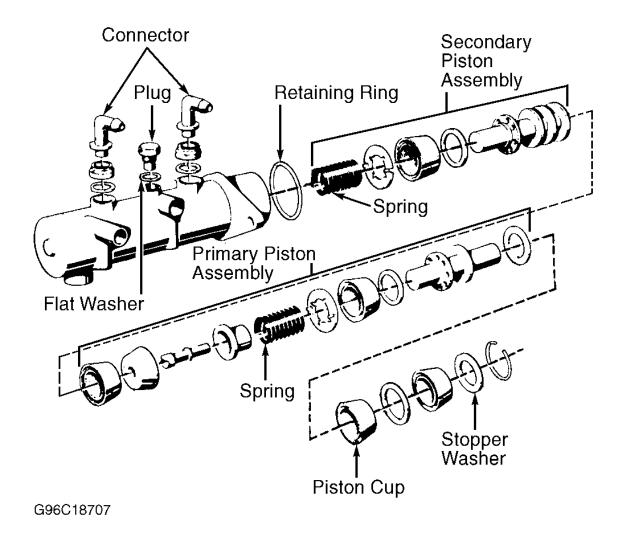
Exploded View Of Master Cylinder Assembly Courtesy of BMW OF NORTH AMERICA.
